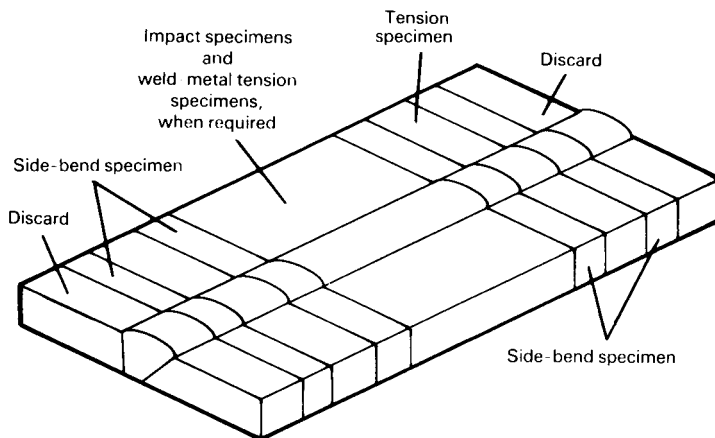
Typical location of test specimens from groove welds in butt-joint test plate
